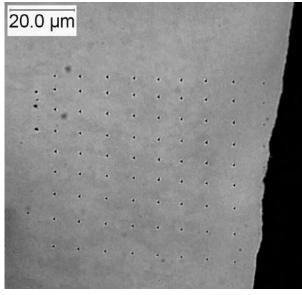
Array of nanoindentations on the drillhole wall in a Ti-6Al-4V workpiece obtained at a cutting speed 183 m/min and 0.051 mm/rev feed without supply of cutting fluid.
